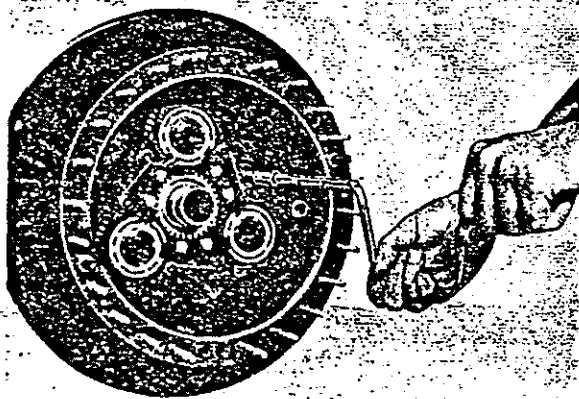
Removing Torquemeter Carrier and Gear Assembly Bolts
